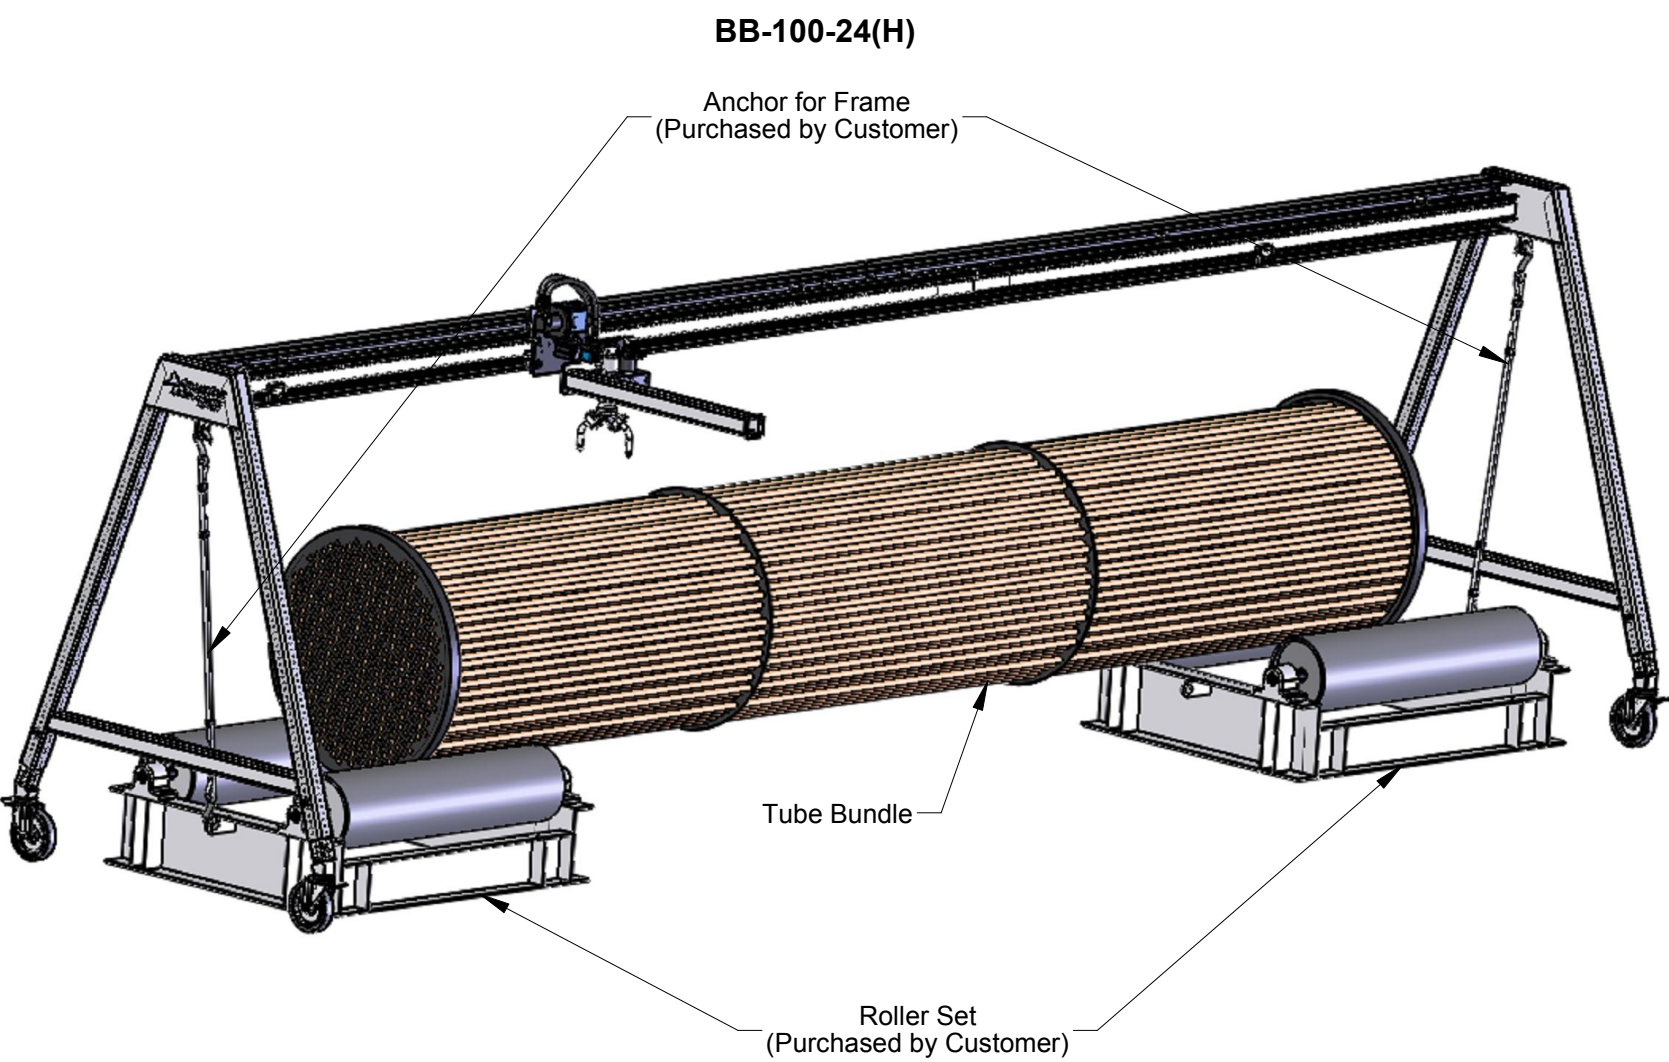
The BB-100-24(H) Assembly spans 24 feet and can be used for cleaning shorter tube bundles up to 22 feet in length (the BB-100-36(H) Frame Assembly can also be set up in a short configuration by removing the BB 107-36 Channel Rail Mid Beam Assembly and purchasing an additional section of box rail (the BUD 008-10 Dual Track Box Rail)). This configuration can be used in situations where only short tube bundles are being cleaned. The Frame assembly can either be anchored directly to the rollers as shown above, or for even shorter bundles, the rail clamps can be used for an optional anchor point. The above short configuration is shown with a 40 inch x 18ft tube bundle.
